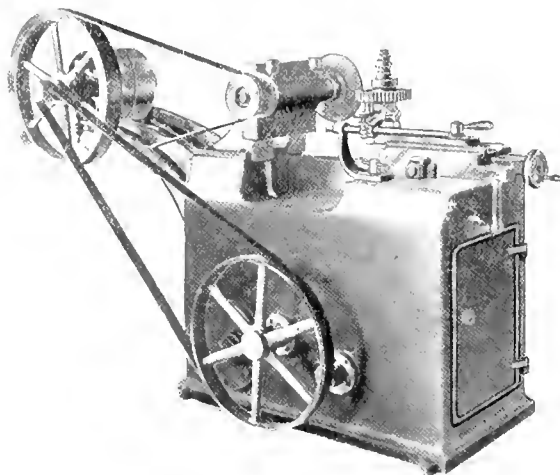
The Upton & Gilman Machine for Finishing the Teeth of Cast Gears by grinding with a Formed Wheel.
